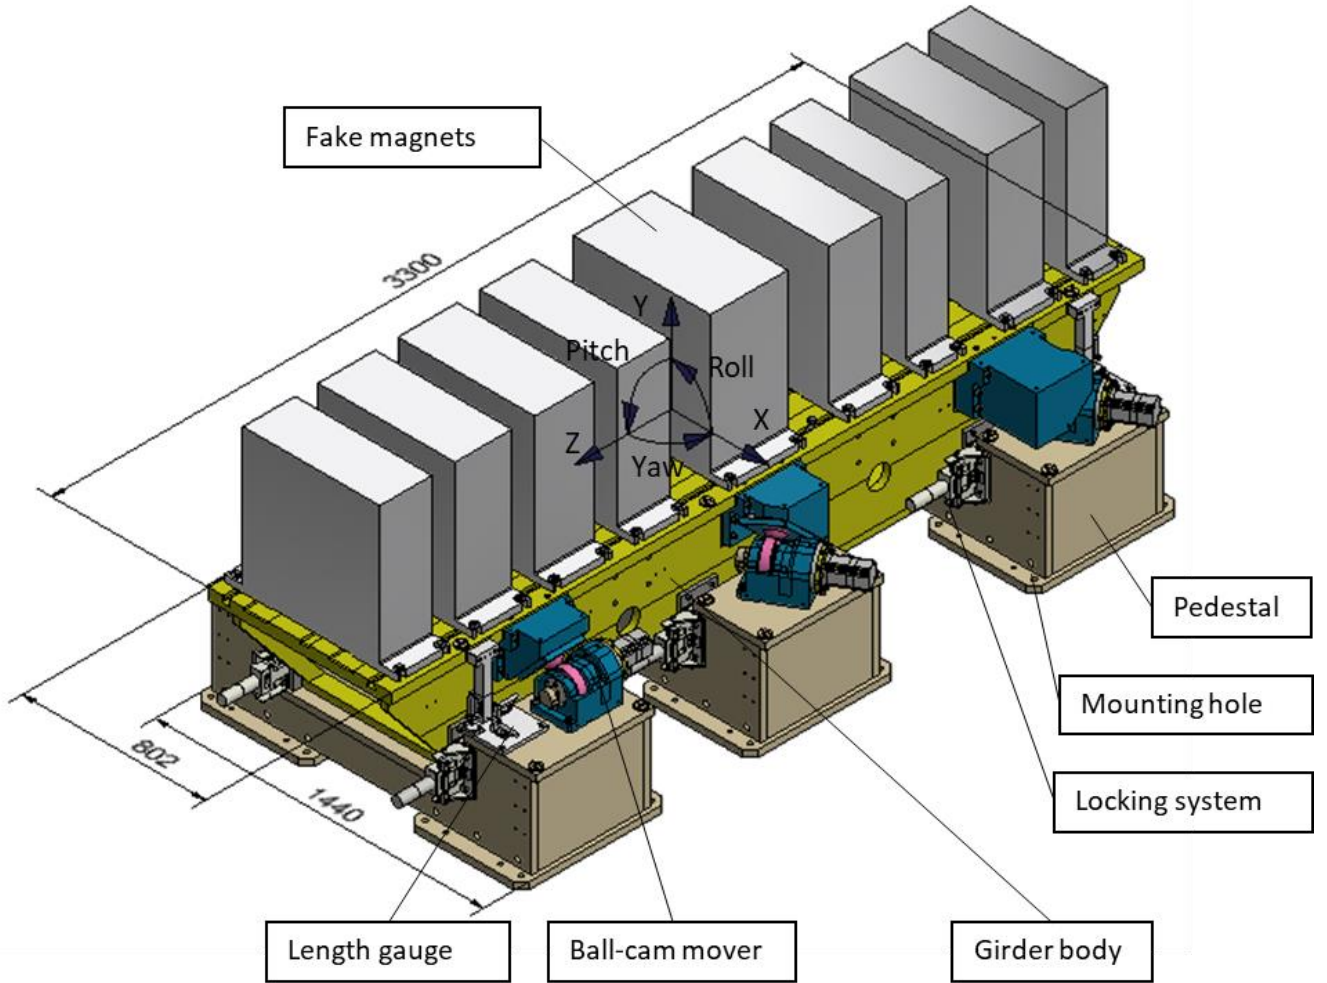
Design sketch of the auto-tuning magnet girder prototype
